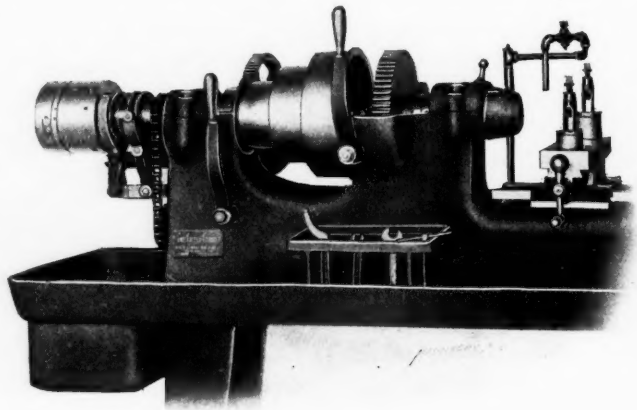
View of Headstock End showing Construction of Friction Geared Head in conjunction with independent adjustable stops for each hole of the turret. The feed is transmitted from the spur gear on the pull-pin shaft F through two gears and the shaft G to the gears H and I. These latter gears are so arranged that they can be instantly interchanged, as stated, thus doubling the number of available feeds. On the same shaft with gear I, there is a worm meshing with a worm gear. This worm is held in a rocker arm, which throws it in and out of mesh with the worm gear by the operation of the hand lever. The worm gear is keyed to the same shaft that carries the turnstile. The turnstile shaft has mounted on its other end a spur pinion meshing with a rack secured to the under side of the turret slide, resulting in the automatic movement of the turret slide. The small forked lever J passes up through the under side of the turret saddle, and automatically trips out or disengages the feed in connection with the independent adjustable stops for each hole of the turret.
